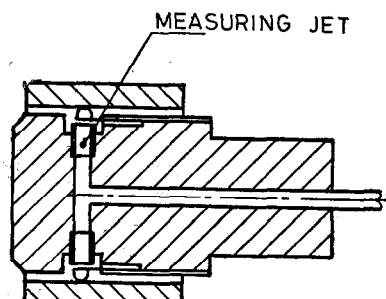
MECHANICAL CONTACT AIR PLUG GAUGE — LEVER OR LEAF SPRING CONTACT AIR PLUG GAUGE
